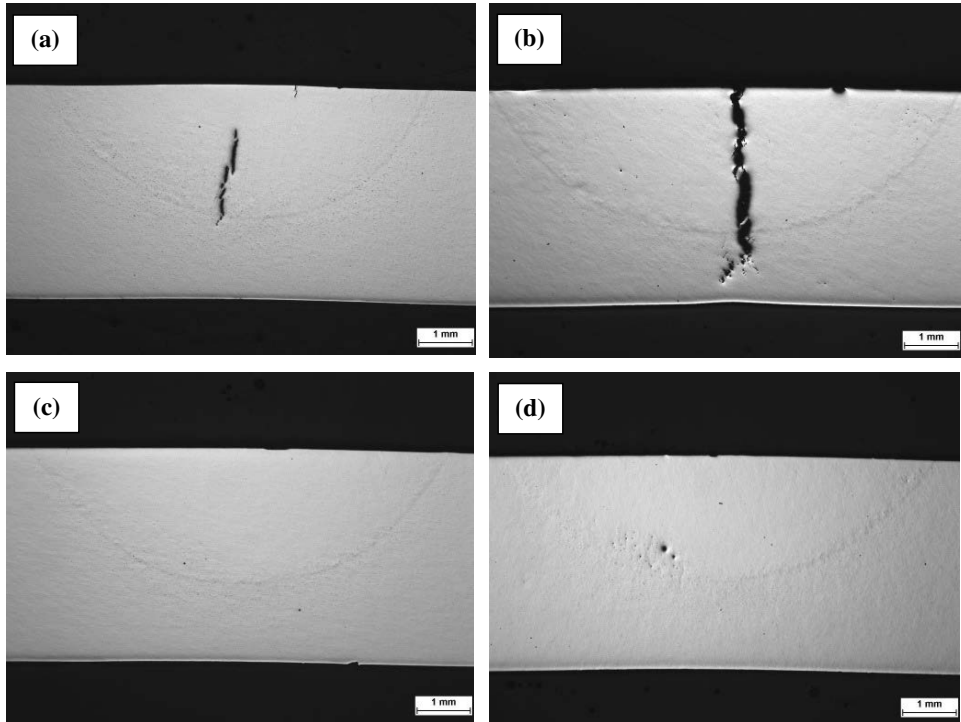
Weld cross-section at low magnification for hydrogen content in welding gas of (a) 0%, (b) 0.10%, (c) 0.14%, and (d) 0.18%. Welding current 105 A.
